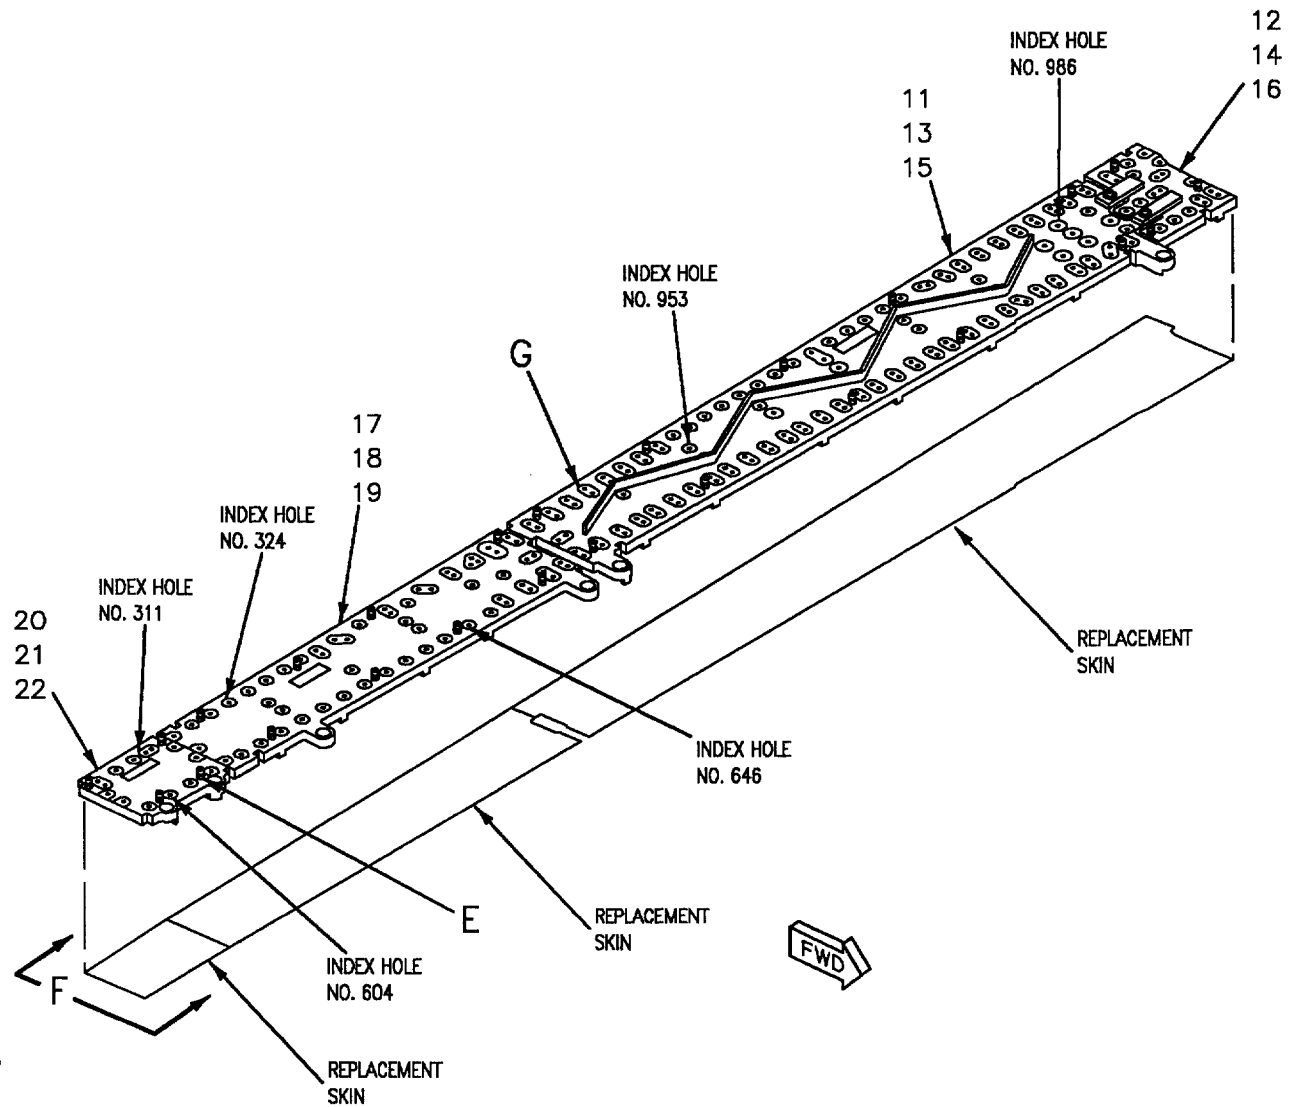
Installation of Plate Set for Drilling 74A180756 Skins (Sheet 1)
